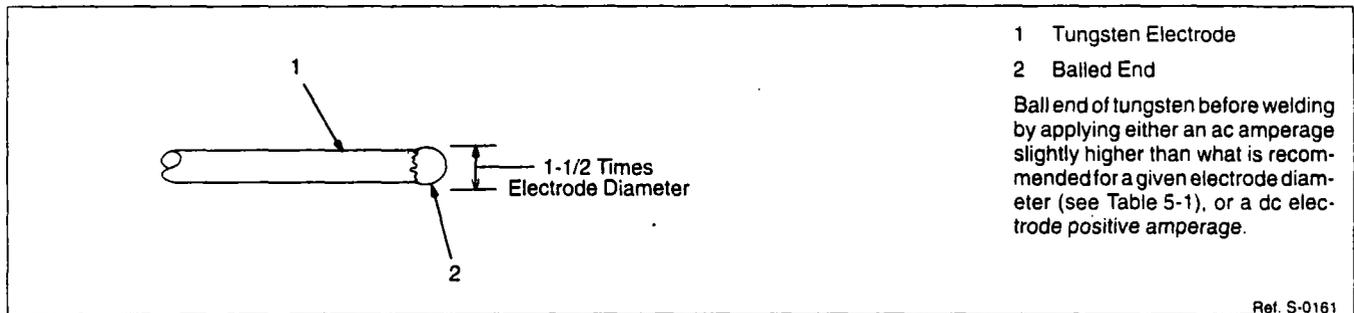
Preparing Tungsten For AC Or DC Electrode Positive (DCEP) Welding
